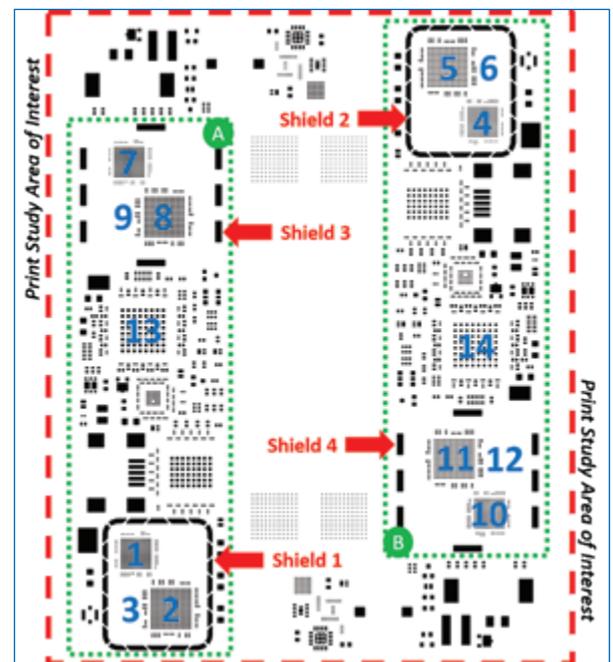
B. Full stencil detail of solder paste inspection and optical microscopy template.
